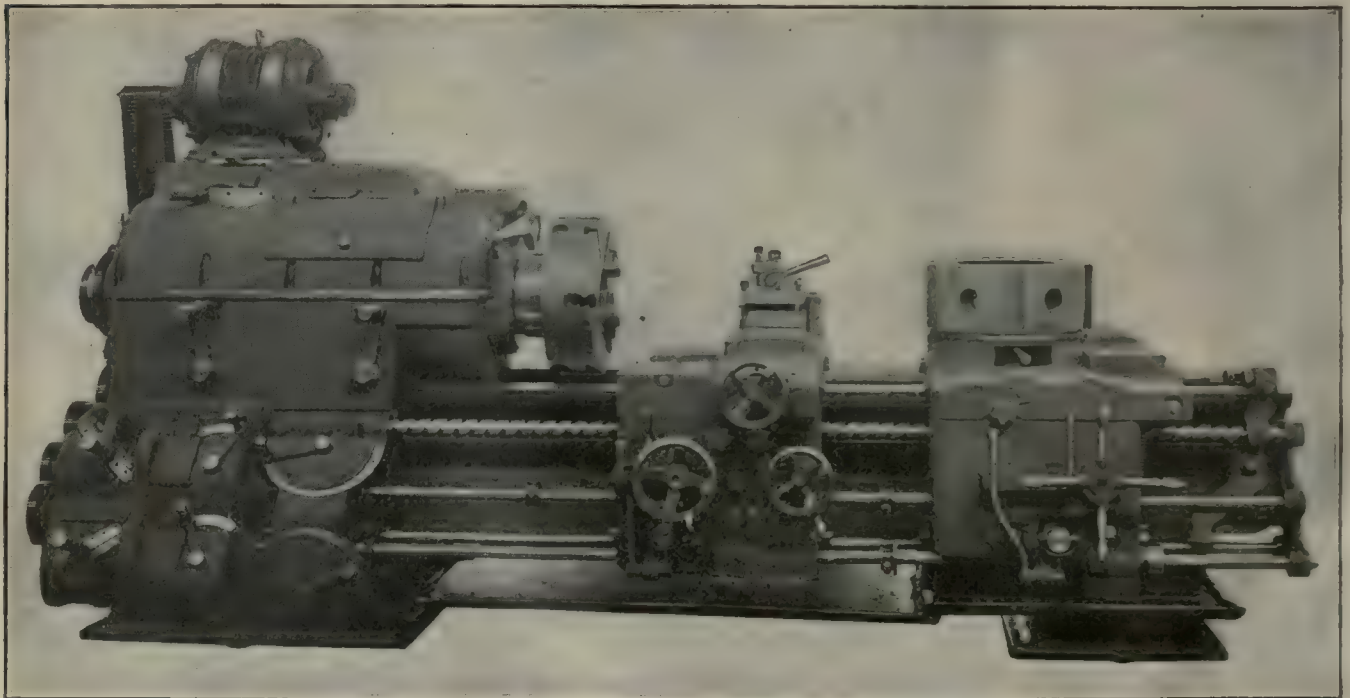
DUFF, 26-IN. HEAVY-DUTY TURRET LATHE
